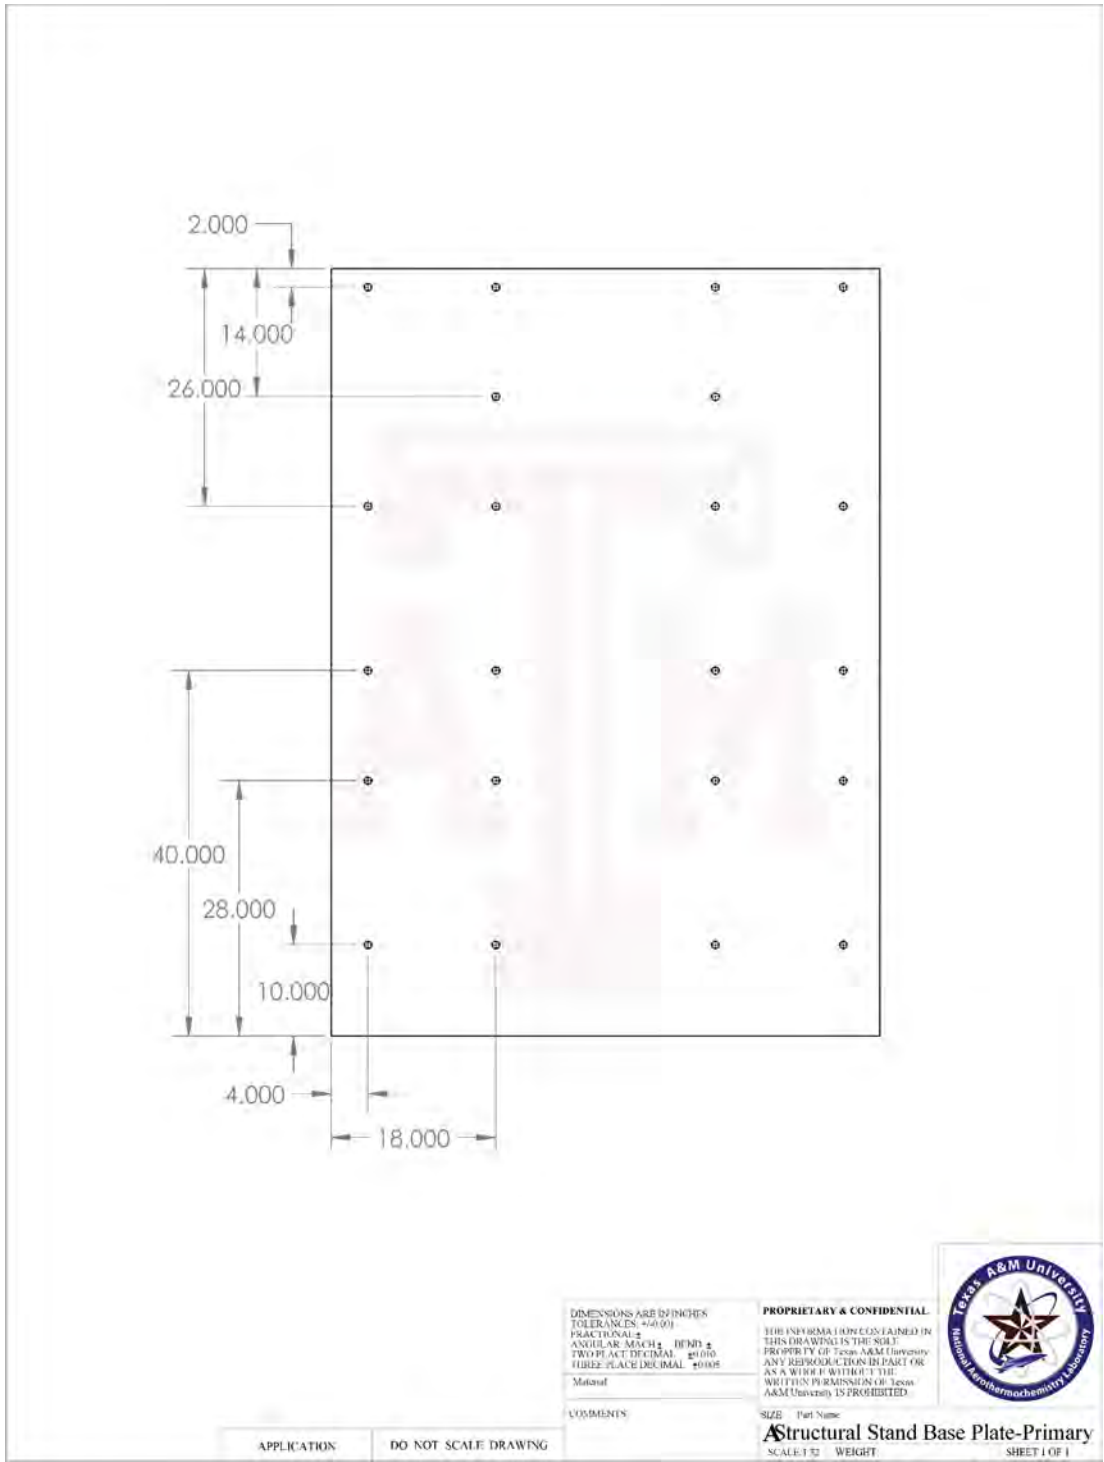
DIMENSIONAL DRAWING FOR PRIMARY STAND BASEPLATE WITH 3/4-IN FREE CLEAR HOLES THAT ARE TORCHED INTO THE PLATE.
